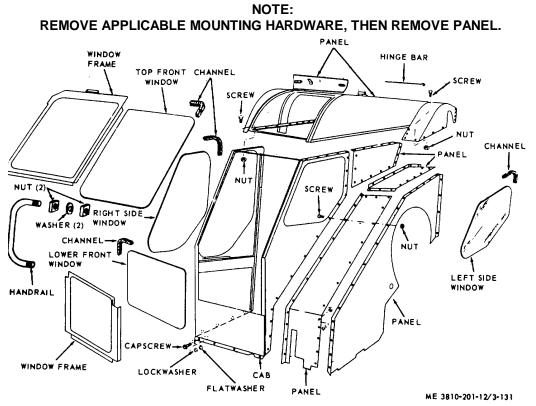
Handrail, panel, window frame, and cab, removal and installation.
